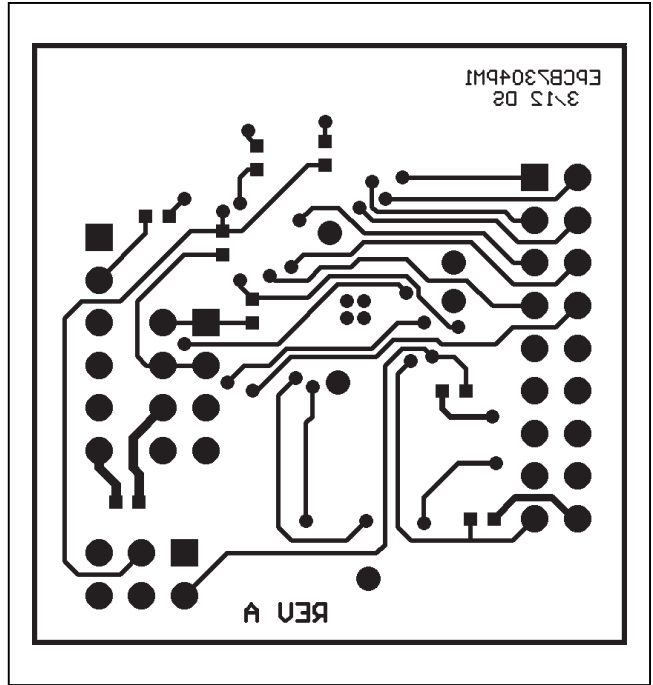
MAX7304PMB1 Peripheral Module PCB Layout—Solder Side
